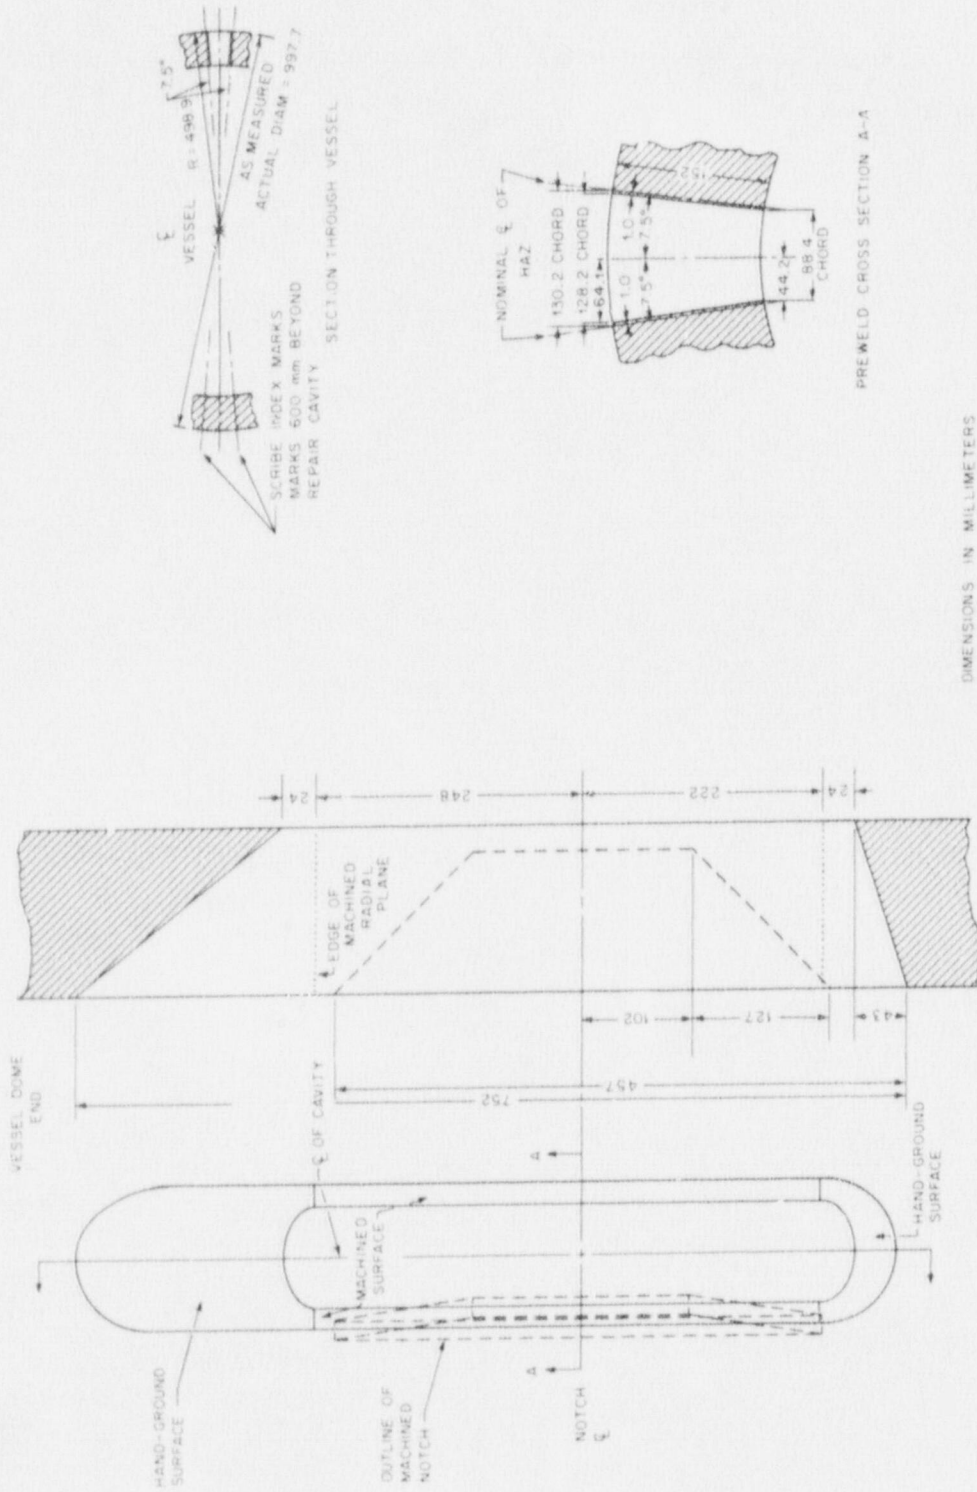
Test piece for determining feasibility of flawing a half-bead weld repair zone by the electron-beam welding and hydrogen-charging procedure.
